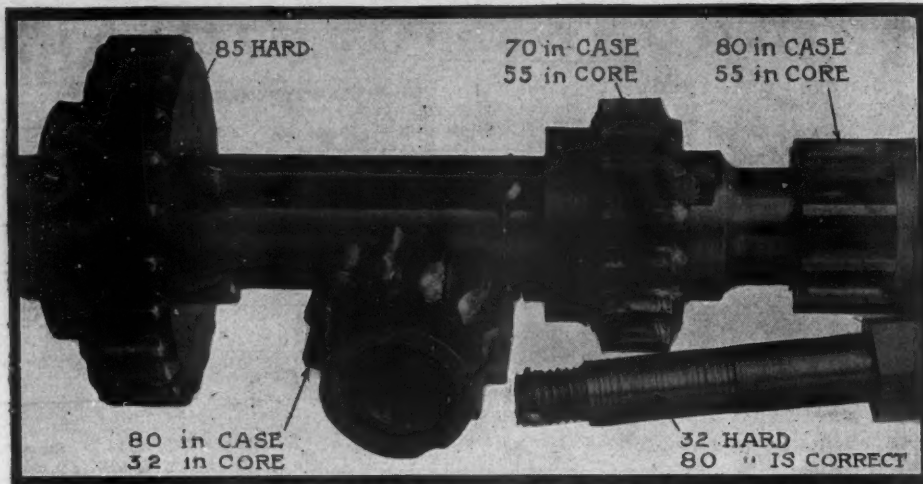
LAY-SHAFT AND CLASH GEARS WHICH FAILED TO MAKE GOOD
